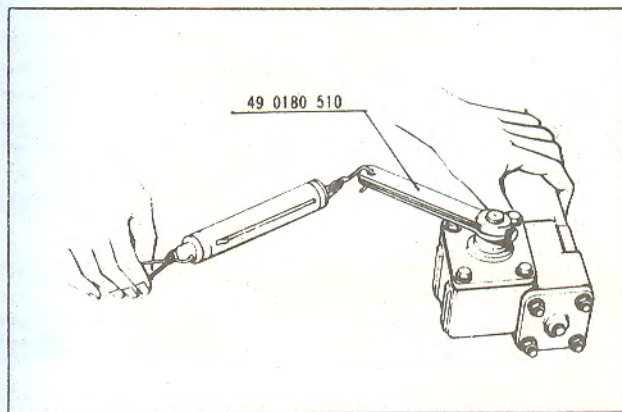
Checking the steering bearing pre-load. The special lever is clamped to the end of the sector shaft.
